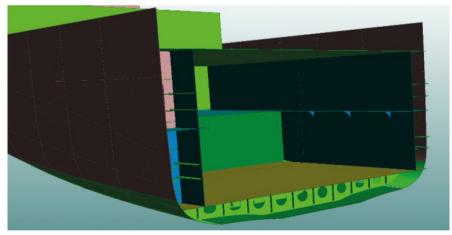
Example of pillars in a matrix with automatic connections to girders and the deck below
